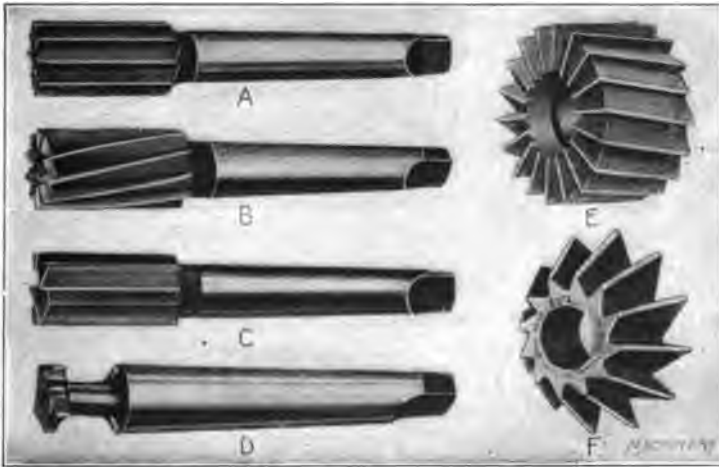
End Mills, T-slot Cutter, Shell End Mill, and Angular Cutter
